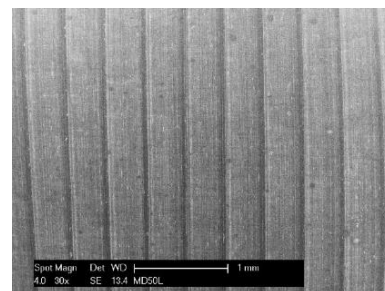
Surface condition of machined test samples; sample MD50 [Havlik 2012]
